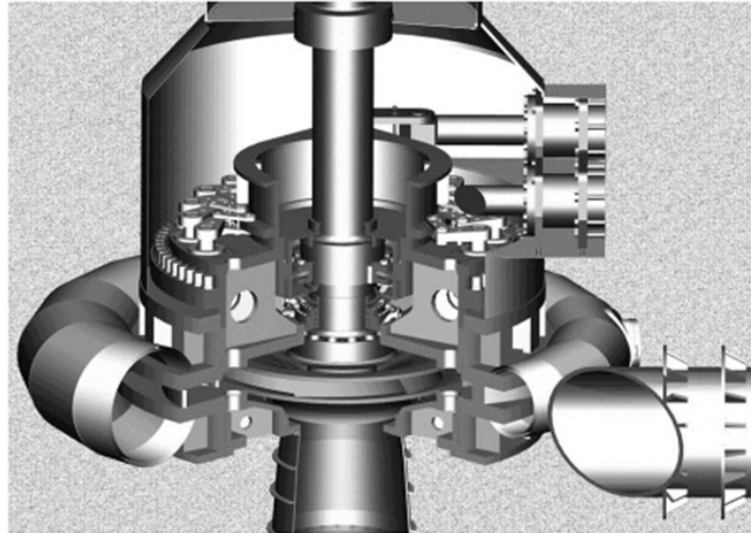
Isometric view of a pump-turbine prototype: Kazunogawa (Japan) - 400 MW, [69]
